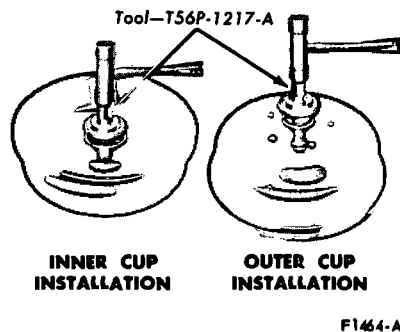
Installing Front Wheel Bearing Cups—Drum
